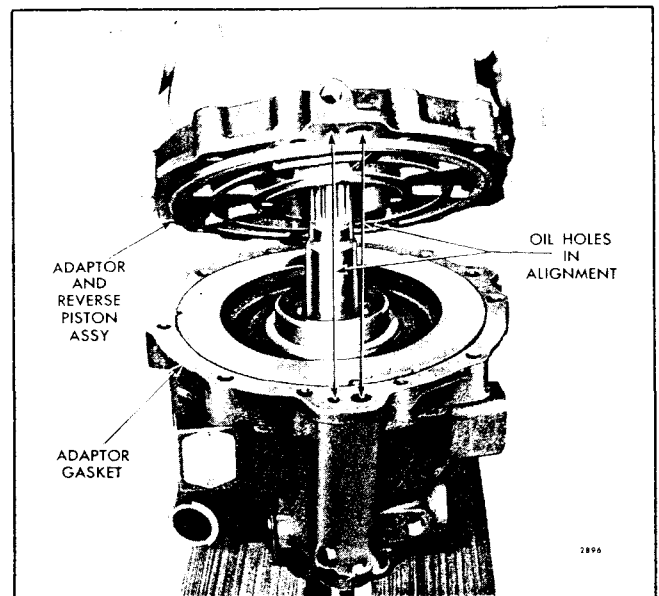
Installing Adaptor and Reverse Clutch Piston Assembly on Input Shaft and Gear Housing
